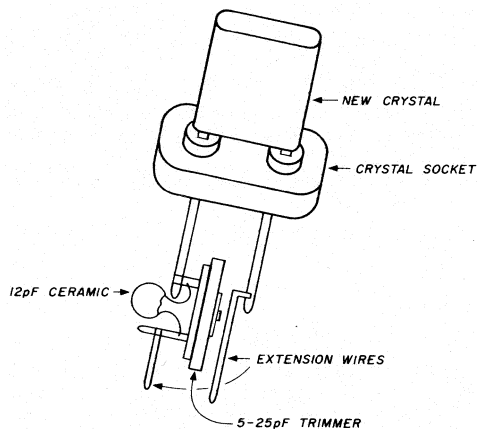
Construction of the crystal paddler, which plugs into the R-4B receiver crystal socket.
